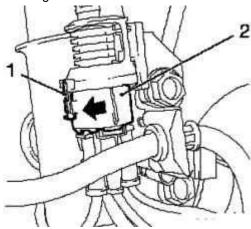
The blocking mechanism: 1 - locking mechanism, 2 - a secondary locking mechanism
